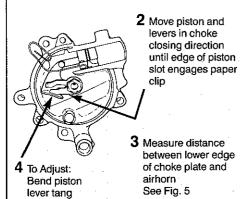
CHOKE QUALIFYING (INTEGRAL CHOKE) ADJUSTMENT Rotate cover to align ref. mark on cover with specified mark on choke housing.
